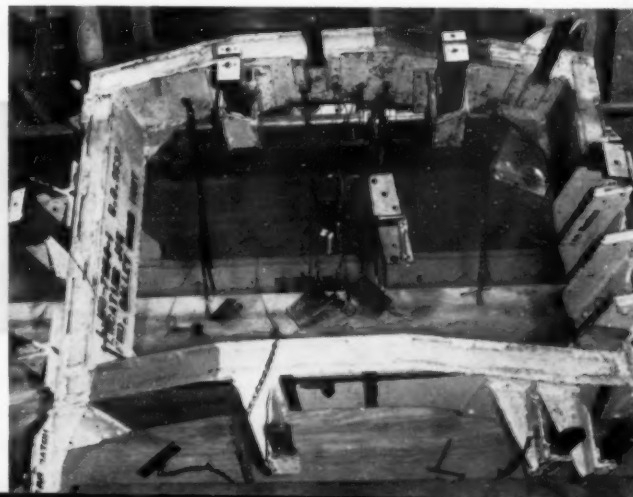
Wing assembly jig using magnesium. The light weight of magnesium provides rigidity and reduces deflection due to cantilever effects on overhanging parts.
